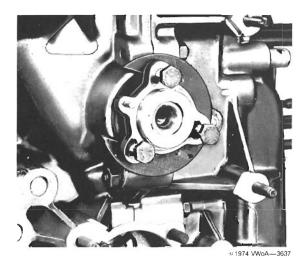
Fan hub being removed from dual-carburetor or fuel injection engine crankshaft. Install special plate VW 185 between the bolts and the crankcase, then gradually tighten the bolts.
